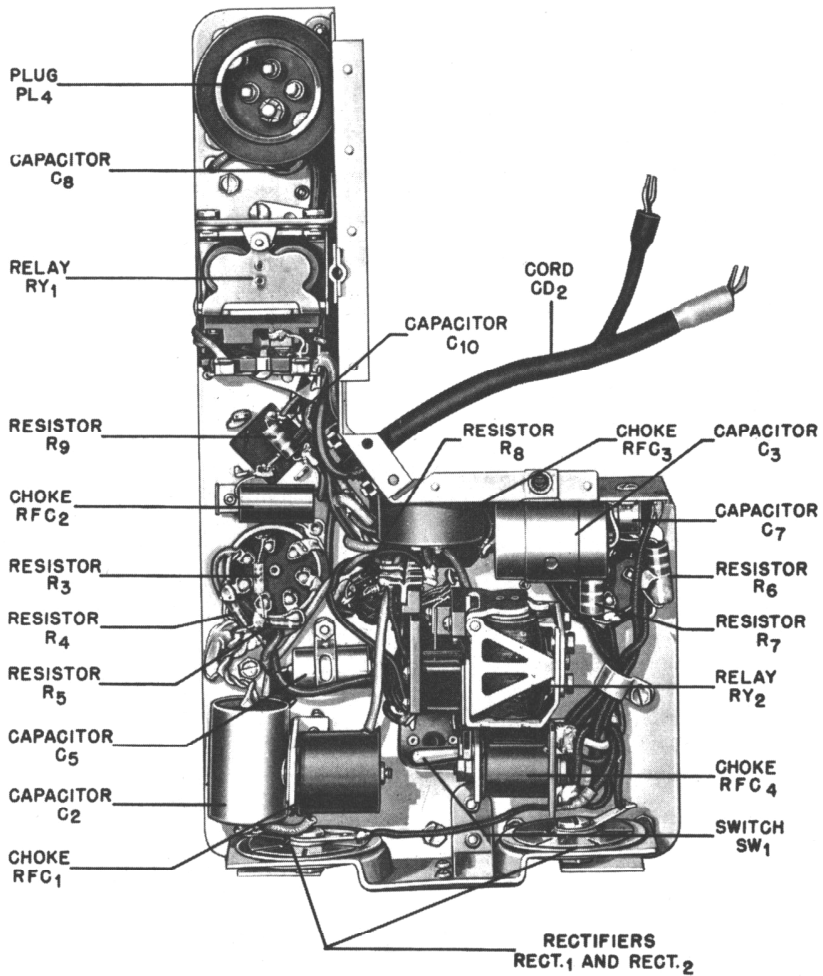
Power Supply Unit PE-157-(\*), Chassis Bottom View
